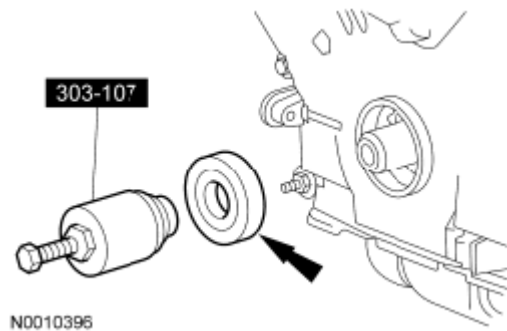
Identifying Front Cover Aligner And Crankshaft Vibration Damper Installer
